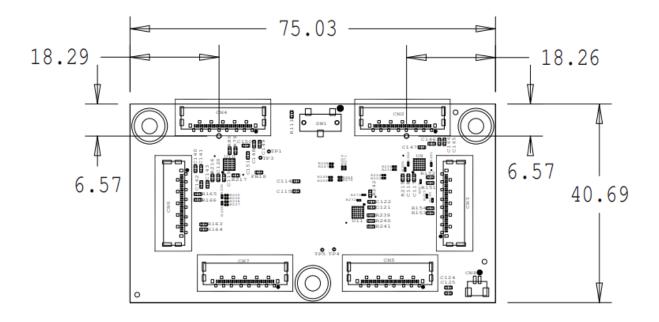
Top View of e-CAM56_CUOAGX Base Board Mechanical Drawing
